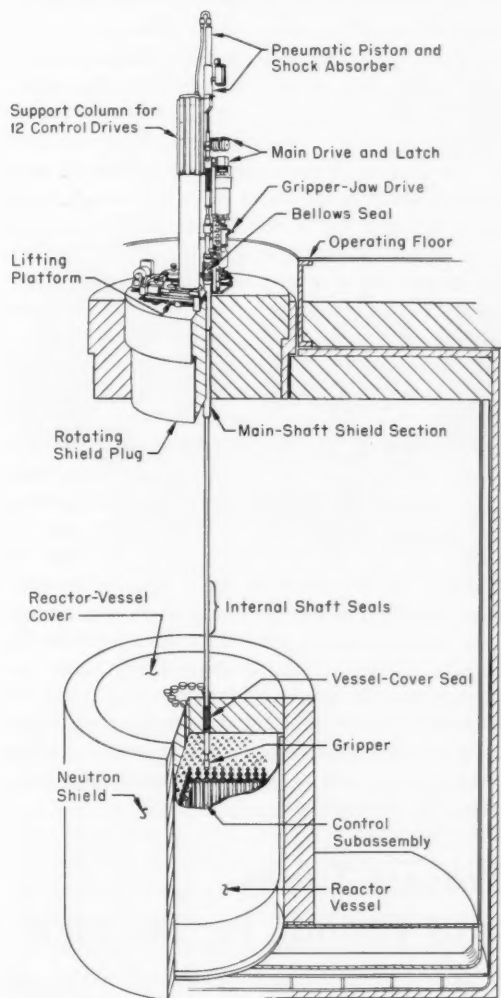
Simplified drawing of components of the EBR-II control-rod drive.<sup>2</sup>
